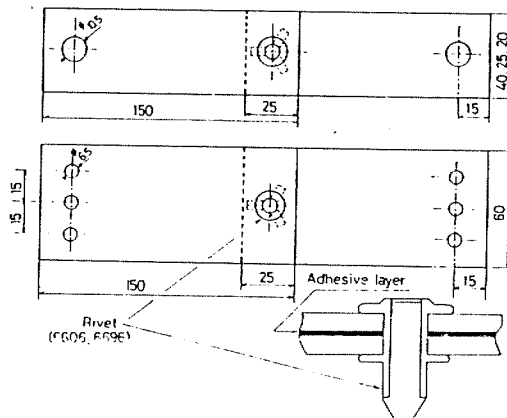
Shape and sizes of the adhesive/rivet combined joints.
